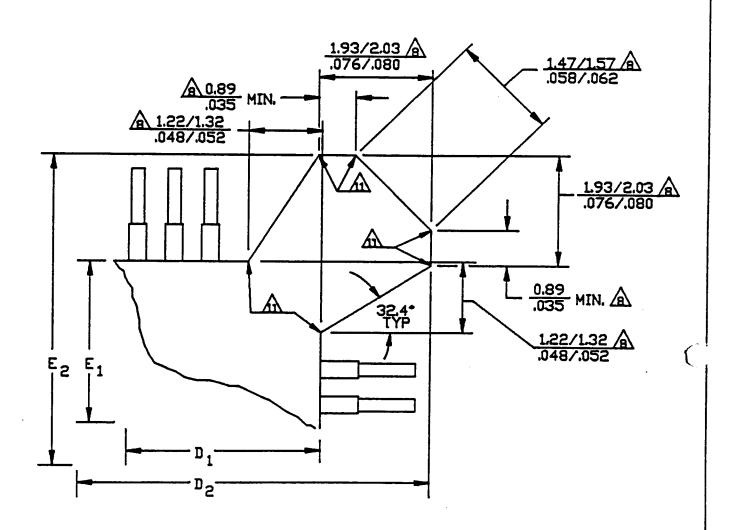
PRINCIPAL DIMENSIONS & DATUMS
